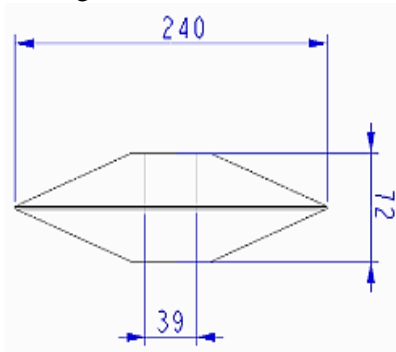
Flywheel dimensions with incomplete cone geometry for initial design
